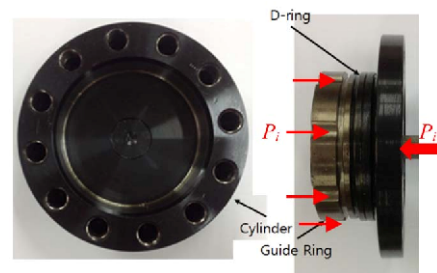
Photographs of cylinder and cover with D-ring, and illustration for oil path ; The guide ring and D-ring is inserted into the cylinder.
